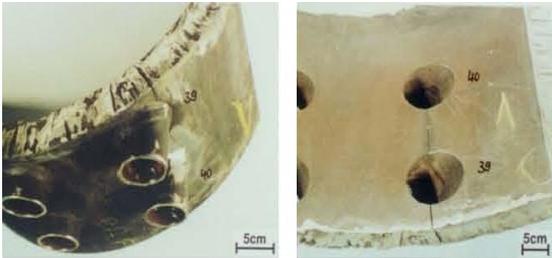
Relaxation Cracking in an Alloy 800 H Outlet Header
